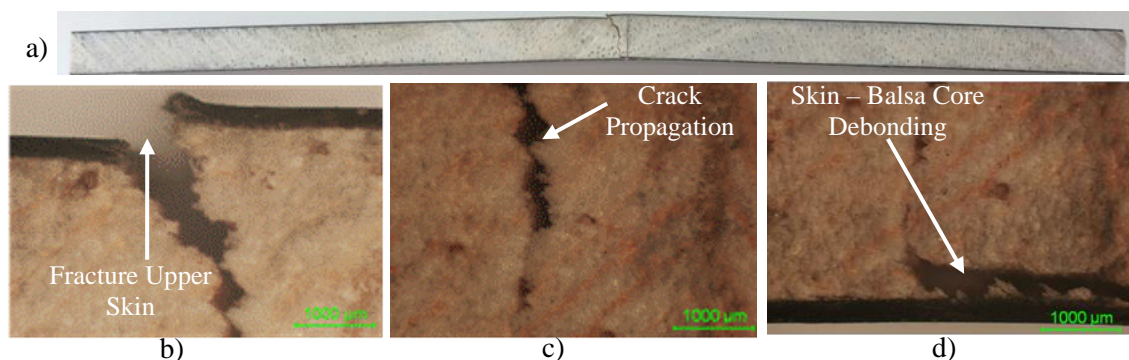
a) Failure of sandwich panel; the macroscopic aspect (magnification 25X) of the fracture area (b – upper skin, c – balsa core, d – lower skin) of the CFRP-balsa specimens tested with a static three-point flexural mode
